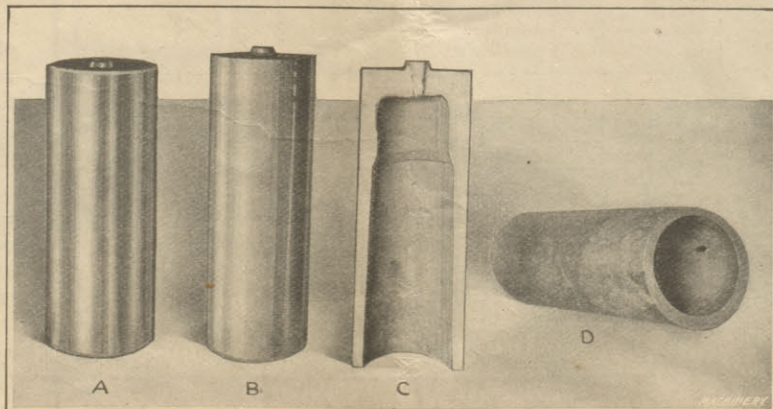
Examples of Shrapnel Forgings turned out on a Power Forging Machine
